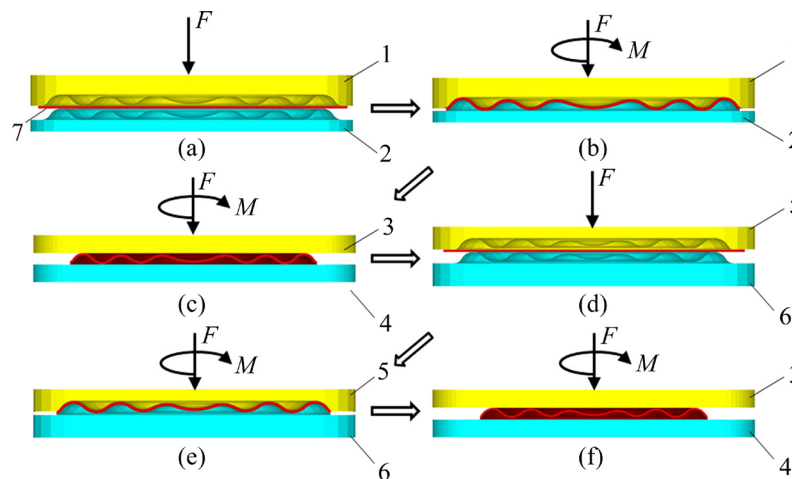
Experimental procedure of annular-corrugation repetitive molding process: 1—Upper ring-groove mold I; 2—Lower ring-groove mold I; 3—Upper flattening mold; 4—Lower flattening mold; 5—Upper ring-groove mold II; 6—Lower ring-groove mold II; 7—Sheet
